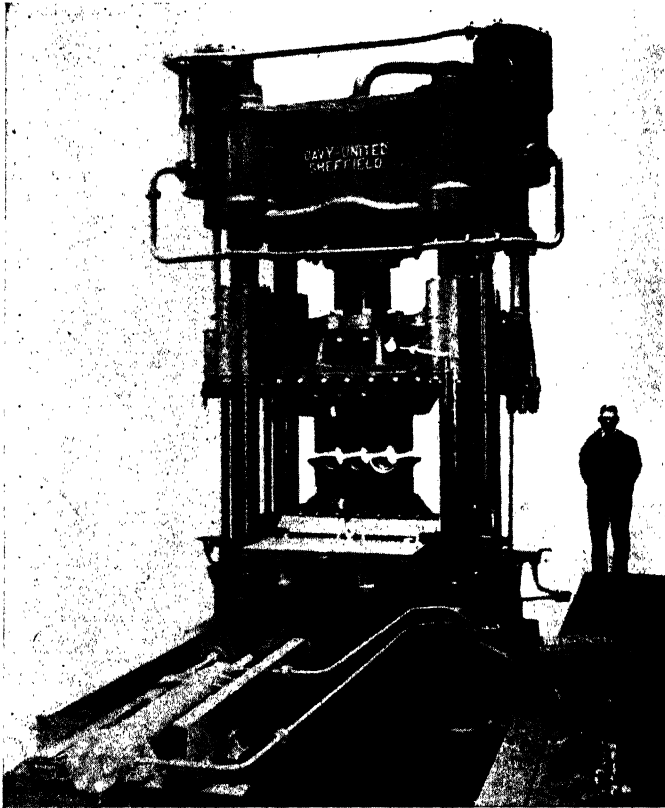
A 1000-ton axle forging press with three-grooved tools.
